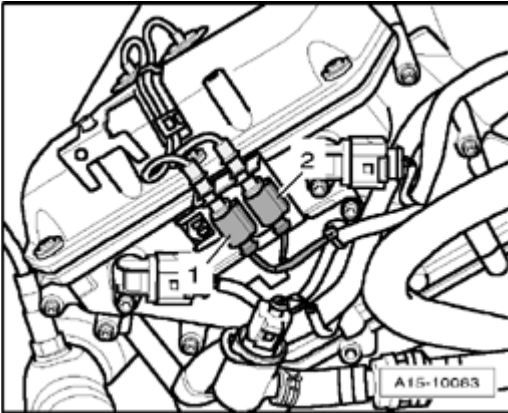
Camshaft Adjustment Solenoid Valves Electrical Harness Connectors
